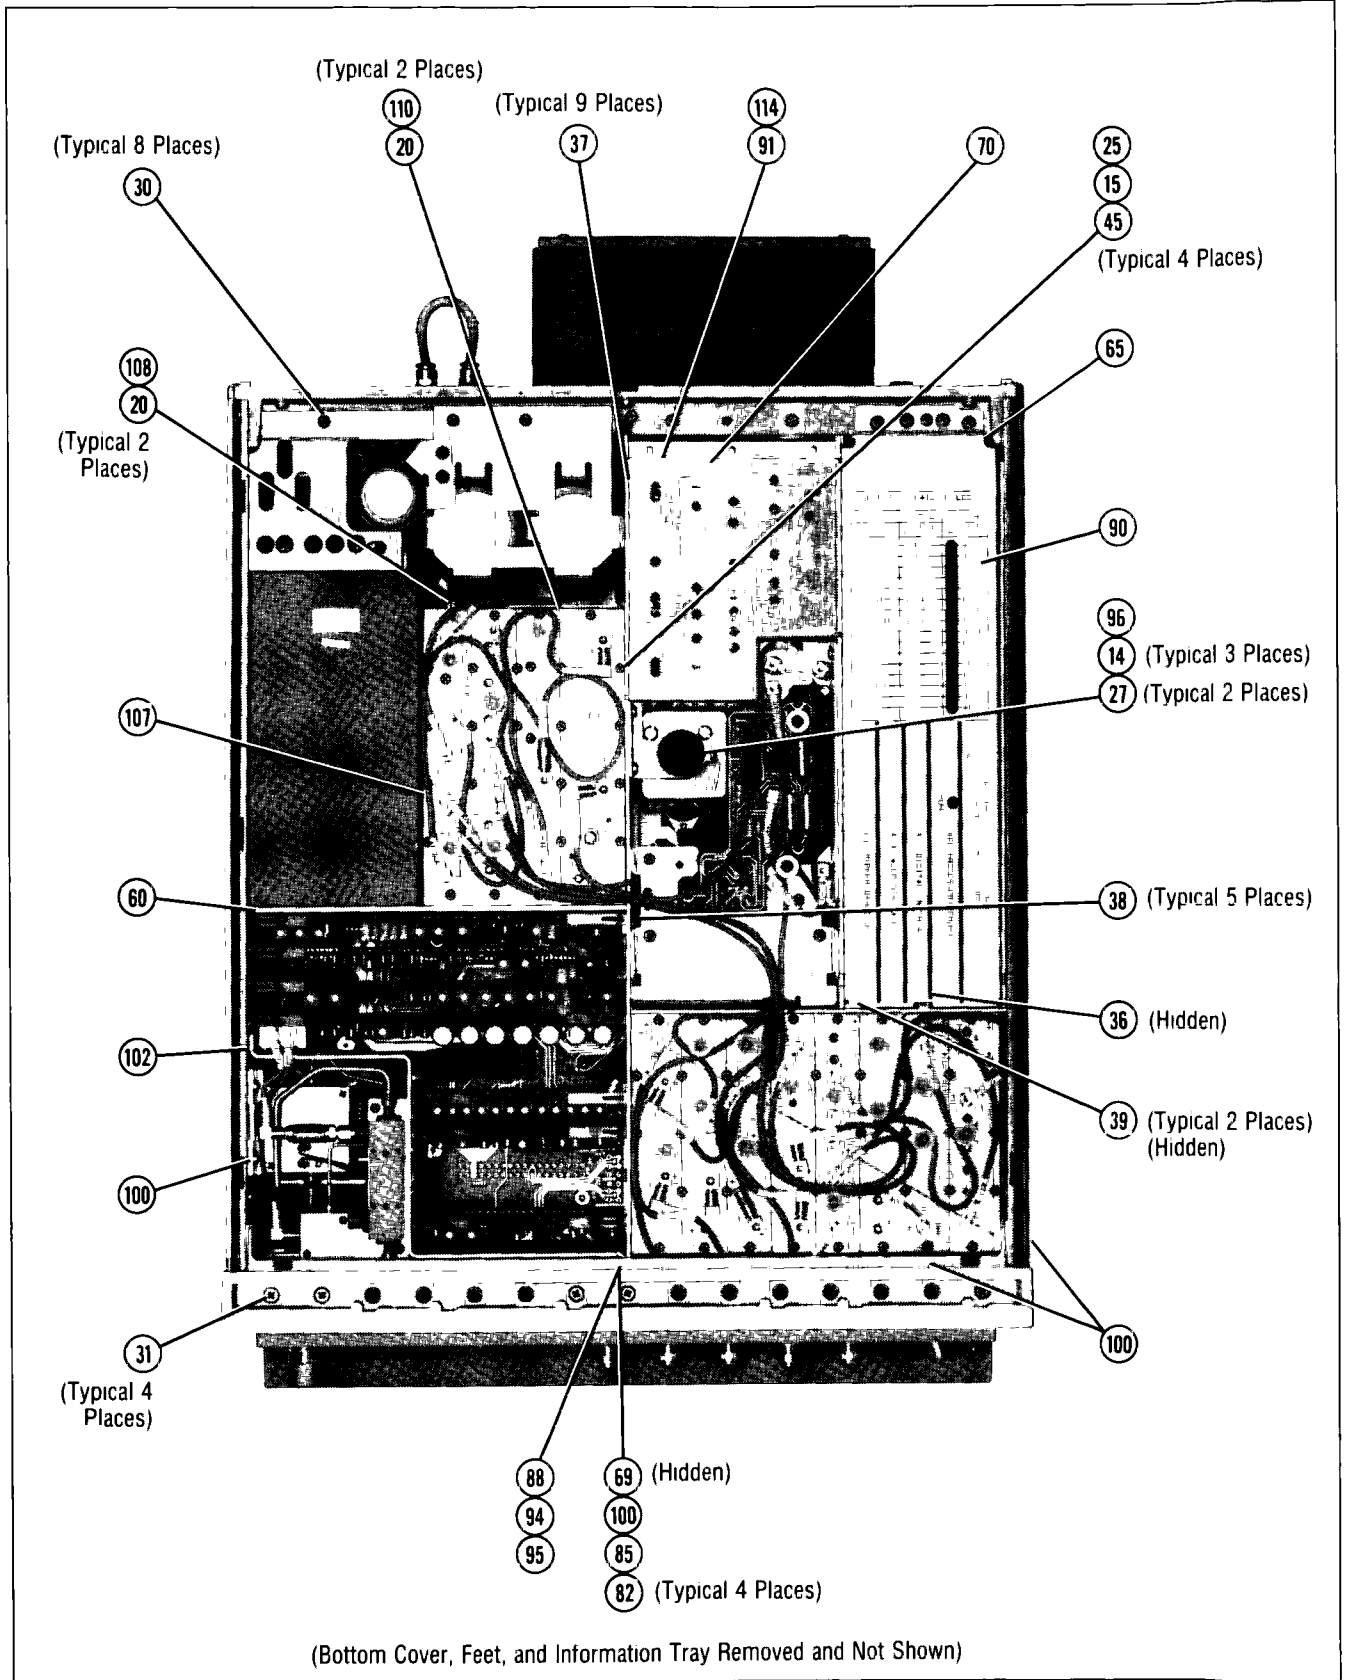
Miscellaneous Mechanical & Chassis Parts (5 of 6)
